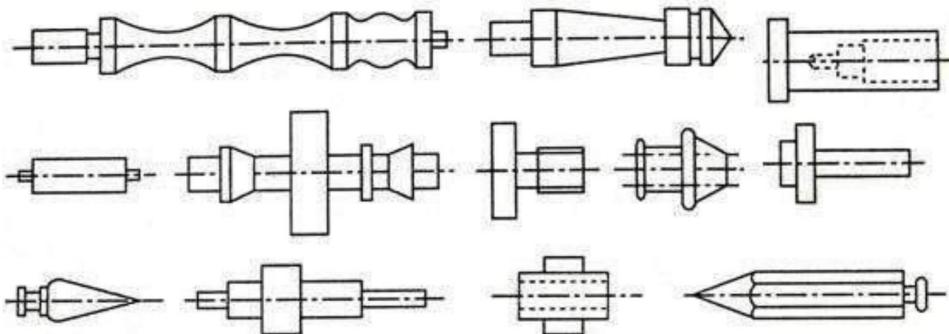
Parts produced on single spindle automatic screw cutting machine
